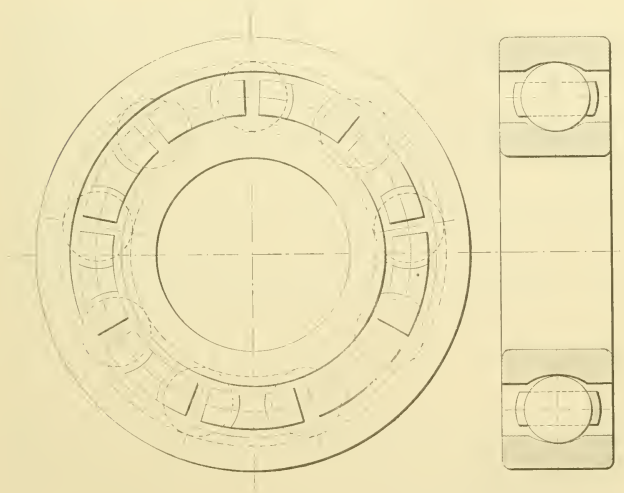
ELEVATION AND CROSS SECTION OF THE HESS-BRIGHT BALL BEARING
